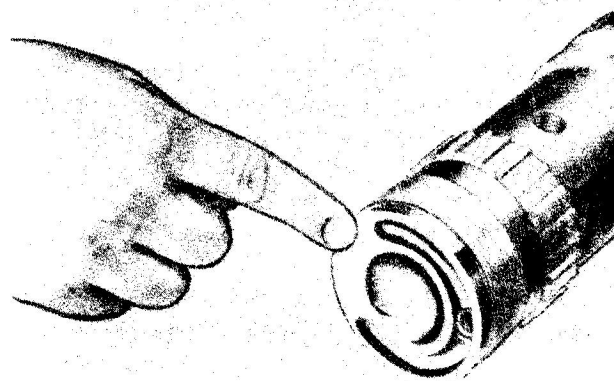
Checking Crankcase Breathing Type Oil Transfer Plate
